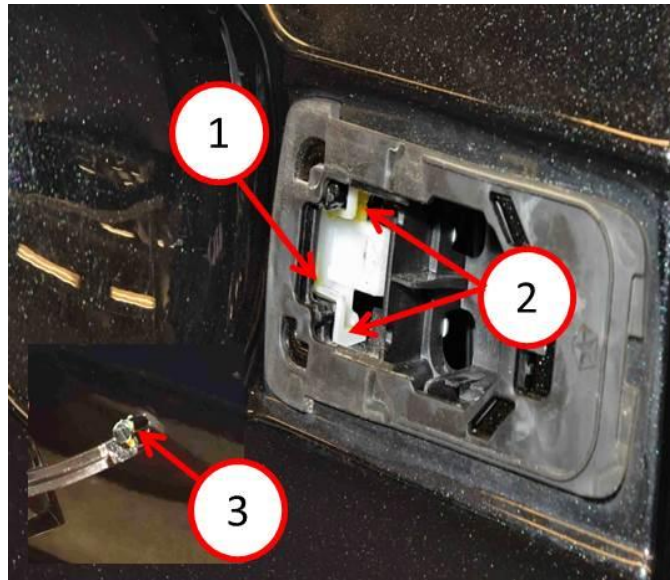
Bell Crank Reset Correctly And Handle Pin
